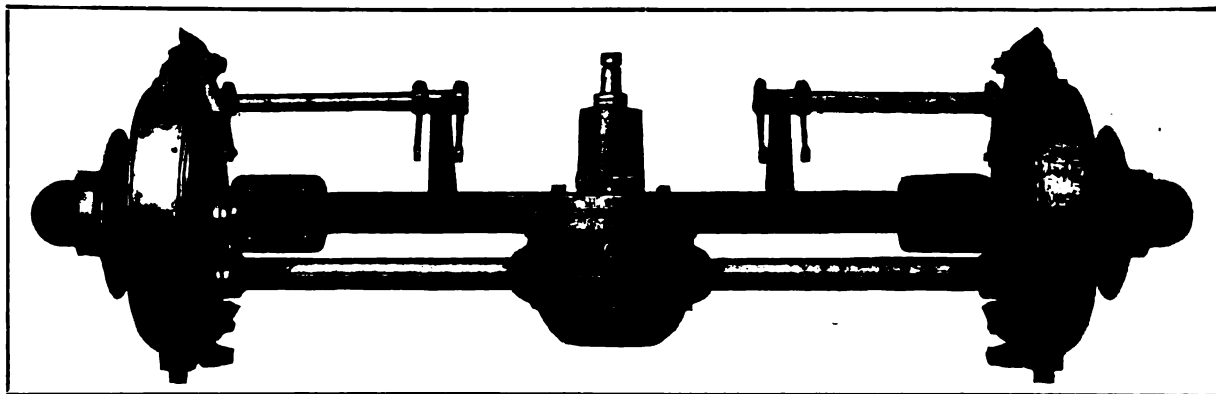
Top View of the Torbensen Rear Axle Fully Assembled and Ready for Installation of Wheels and Springs.
